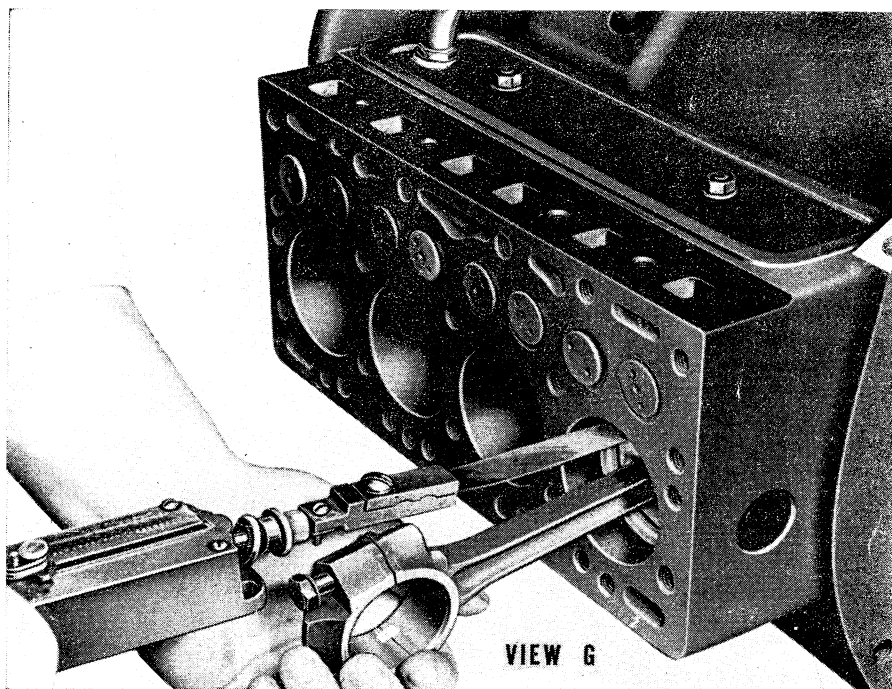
Fitting Continental N62 piston. Use ½ inch wide feeler, .0015 thick. Correct fit requires 5-10 pounds pull.
